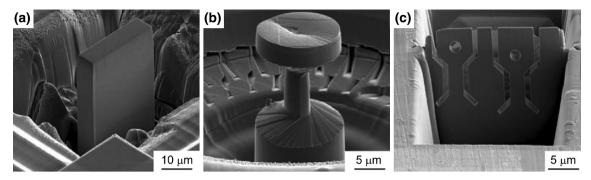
Micro tensile and bending samples machined using FIB [40]. Copyright 2005, Elsevier
